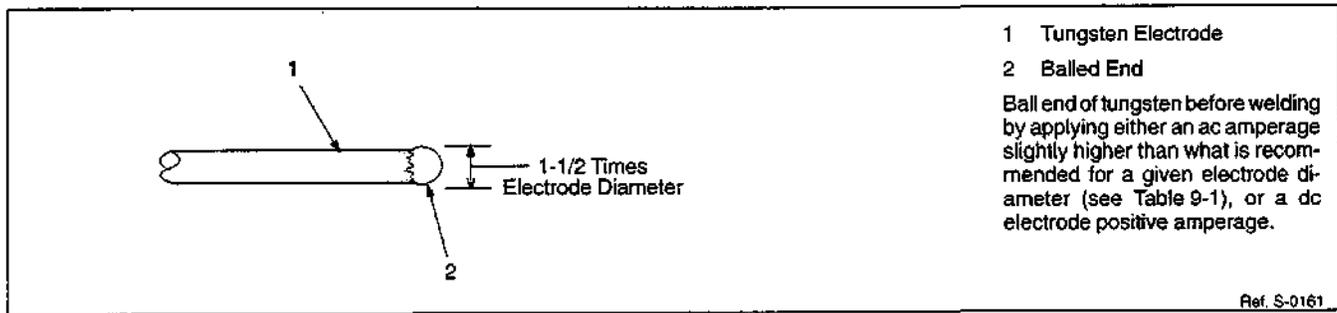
Preparing Tungsten For AC Or DC Electrode Positive (DCEP) Welding
